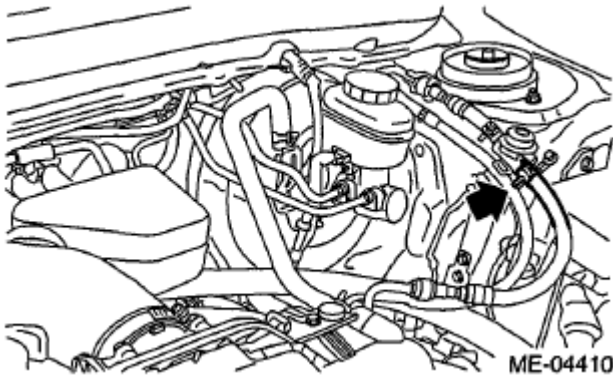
Locating Fuel Delivery Hose Of Fuel Damper
